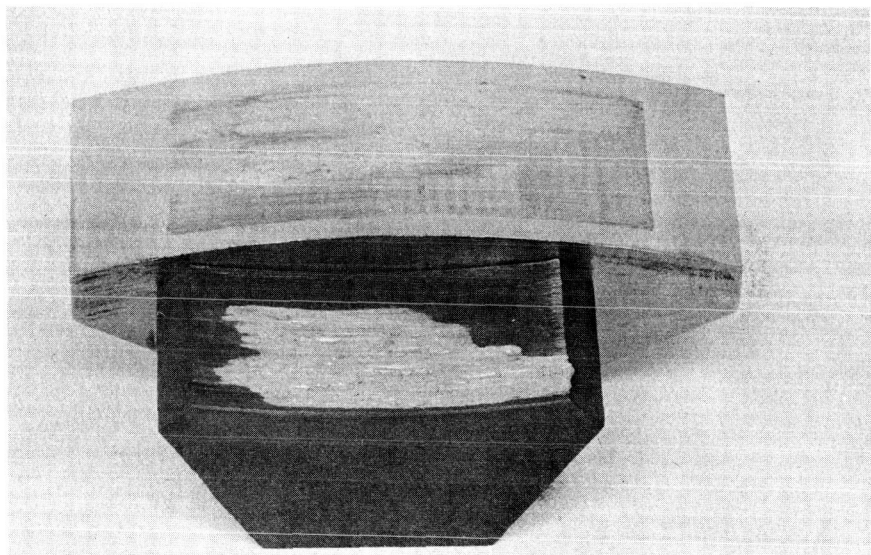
BALL JOINT TEST SPECIMEN TYPE - 20;
